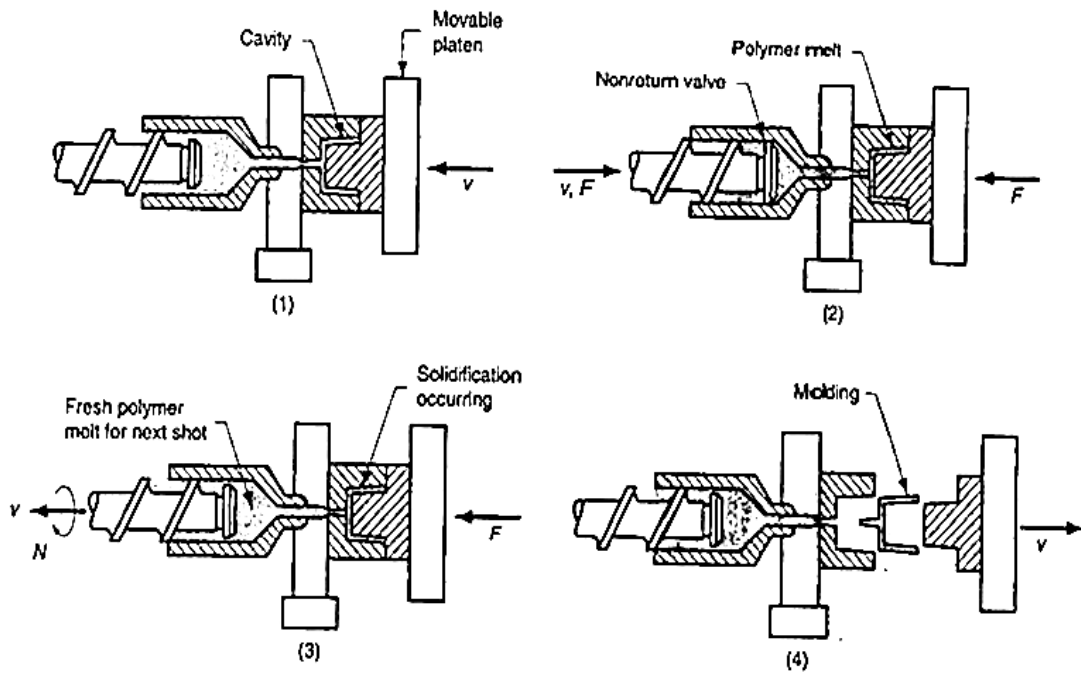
Injection moulding using a reciprocating screw. Source: (Sinotech 2013b)
